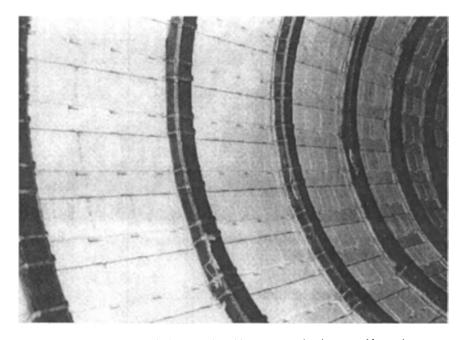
[S04] Section of a large 4-pole turbine generator showing gas-guides made of insulating material.
